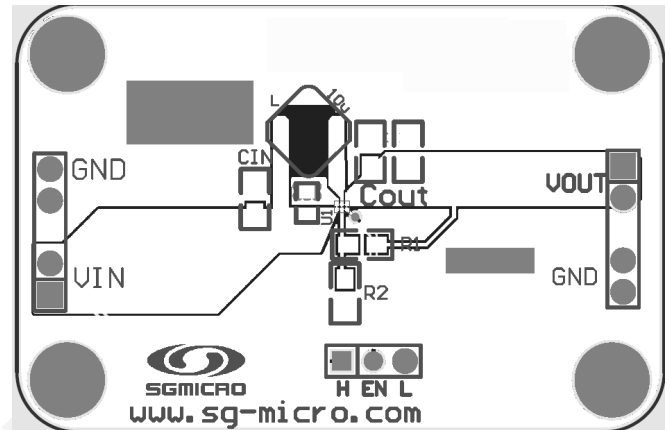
WLCSP-0.8x1.2-6B PCB Layout Example
